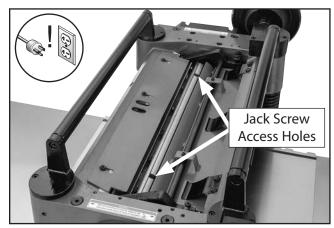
ST1007 & ST1012 jack screw access hole in cutterhead.
